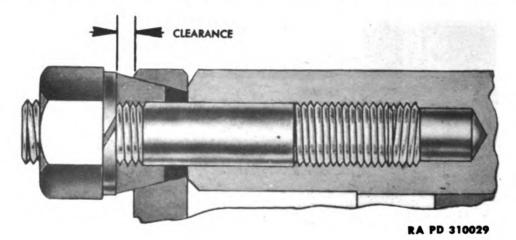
Clearance Required Between Axle Shaft Stud Nut Lock Washers and Driving Flange
